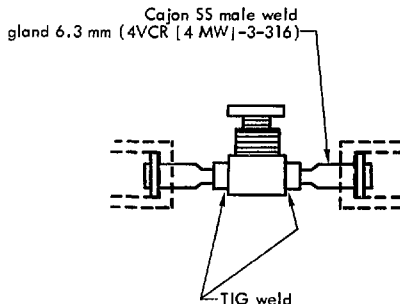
Nupro stainless steel bakeable vacuum valve, SS-4H-SW.
